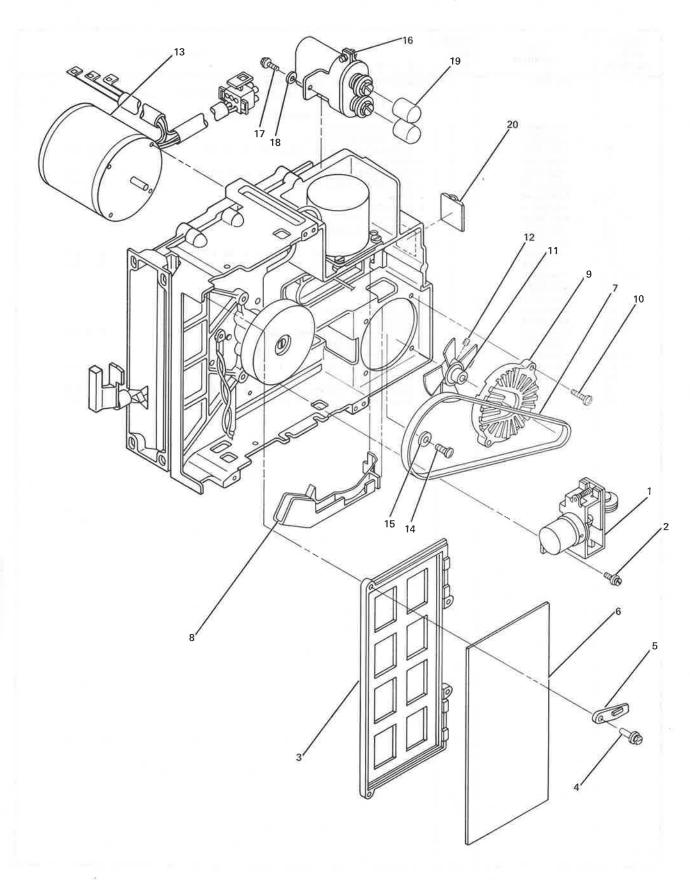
MOTOR, CAPACITOR AND ACTUATOR ASSEMBLY. SEE LIST 12.
